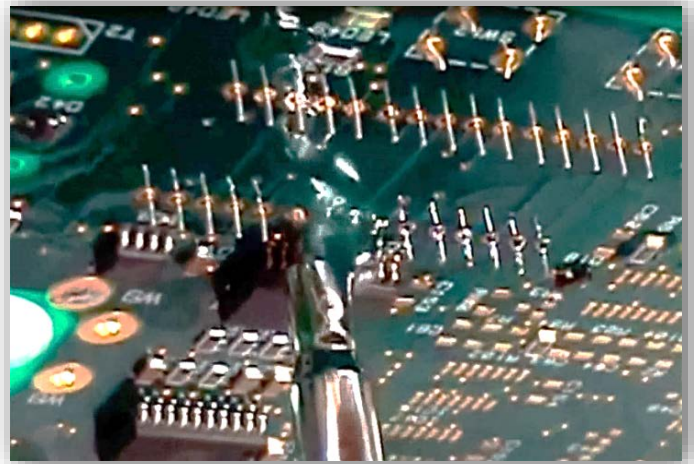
Solder is applied to the leads on the underside of a PCB in the selective soldering process.
